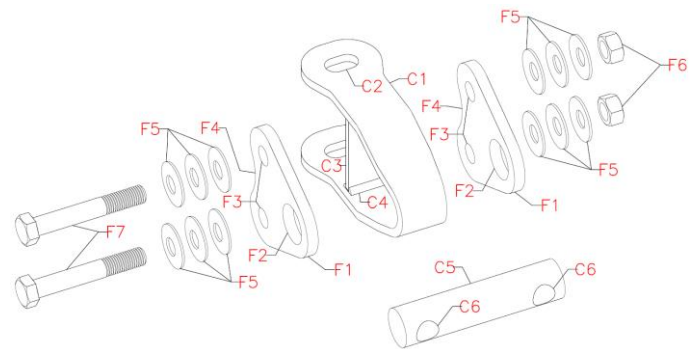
Exploded view of the joint rocker and its clamping jaws / Esploso dell'elemento carrello
